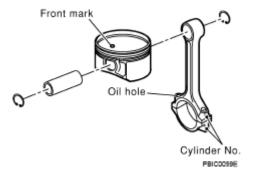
Identifying Piston Pin Snap Ring Into Front Of Piston Courtesy of NISSAN MOTOR CO., U.S.A.
